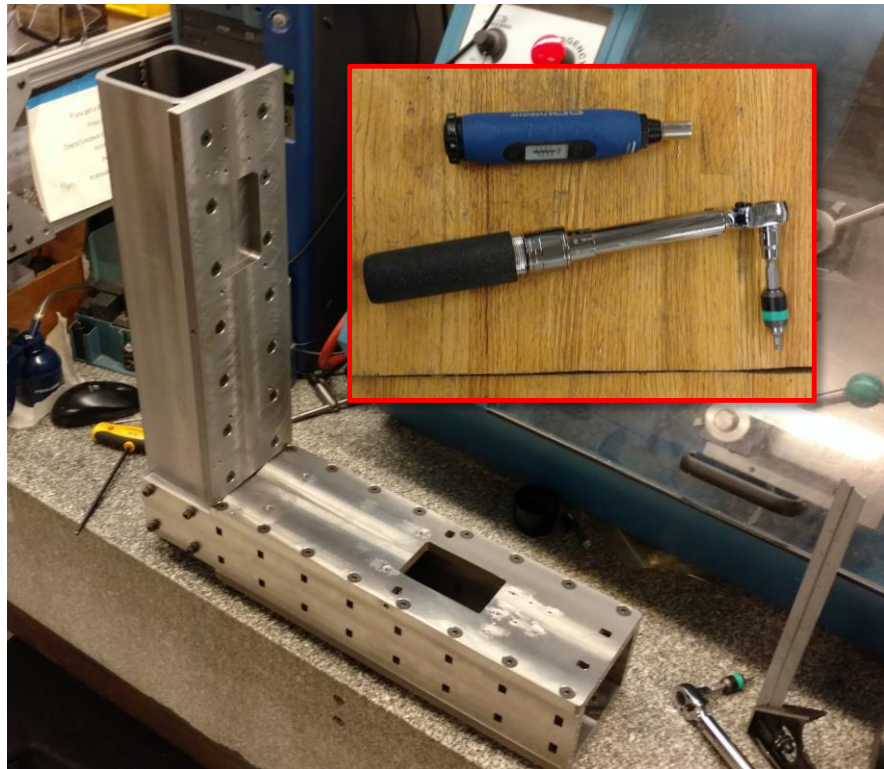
Assembled cutting instrument column and basebeam. *Inset:* torque screwdriver and torque wrenches used for assembly. Starrett square visible in foreground.
